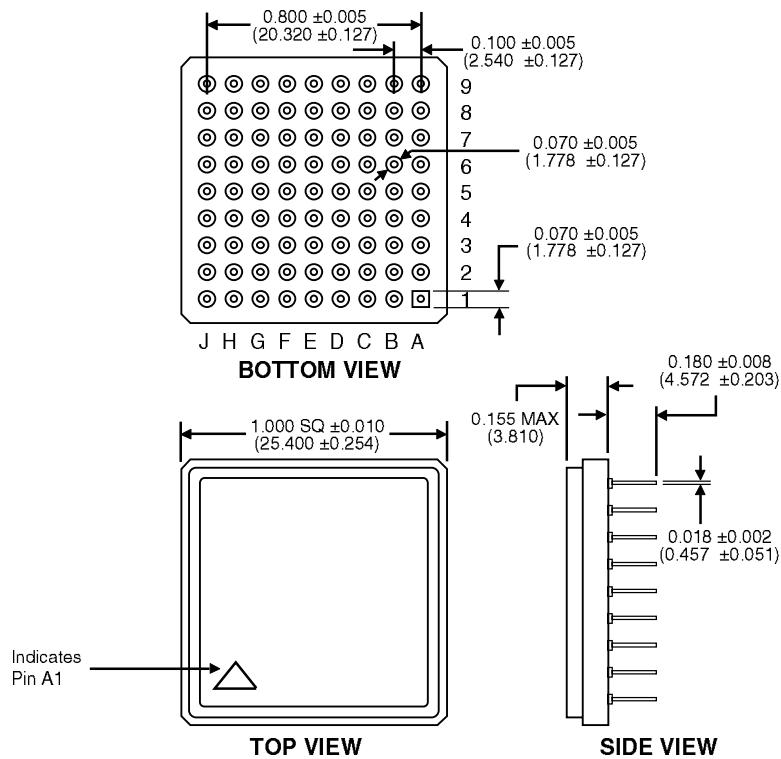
BU-65178P / 65179P* /61588P /61688P* /61689P* MECHANICAL OUTLINE (PIN GRID ARRAY - PGA)
